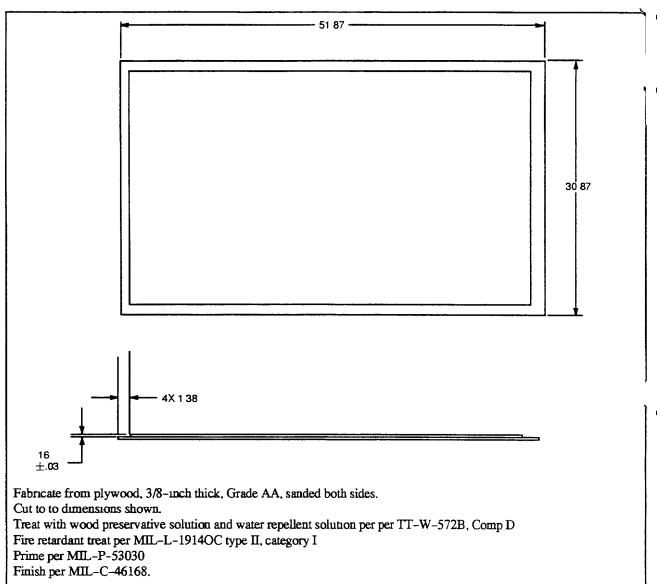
Deflector Assembly Storage Box, Panel, Top.
